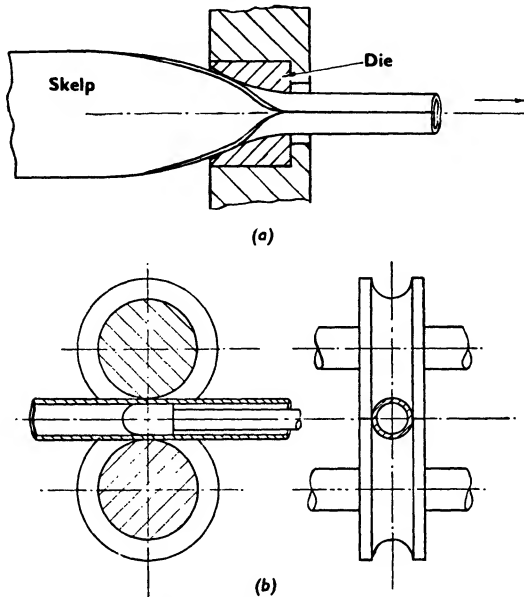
MANUFACTURE OF WELDED TUBE
